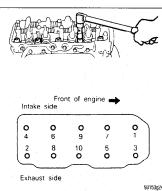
Cylinder head bolt loosening sequence—2.0L SOHC engine
